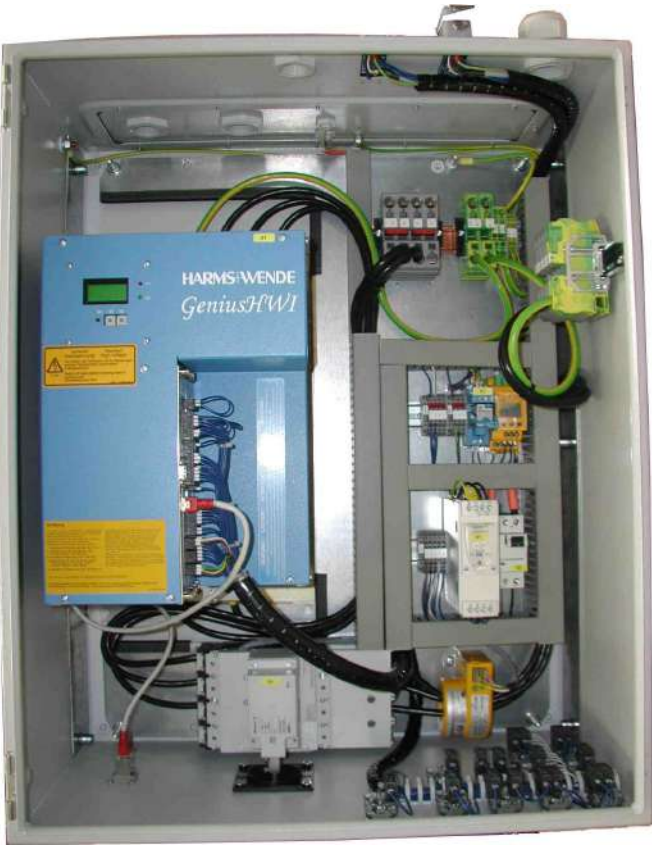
Wall-mounted spot welding system, interior view
